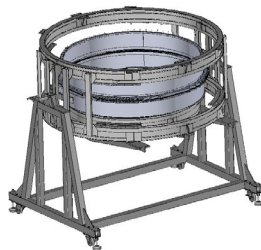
Equipment for assembling a module with a frame inside Fig. 30. Prefabricated design of end-plug
